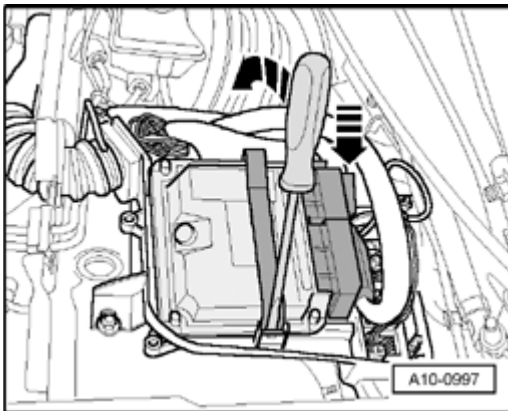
Using Screwdriver To Remove Retainer Bar And Engine Control Module (ECM) J623
